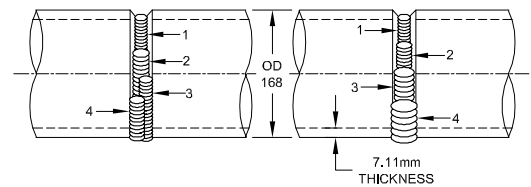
Pipe Weld bead Sequence
